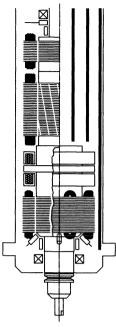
Ultra-fast high-frequency spindles with "active" magnetic bearings. 80 000 min⁻¹, 10 kW, SKI 25; 60 000 min⁻¹, 20 kW, SKI 30; 40 000 min⁻¹, 40 kW, SKI 40. [Courtesy of Rudolfe Carne Ltd/IBAG.]
